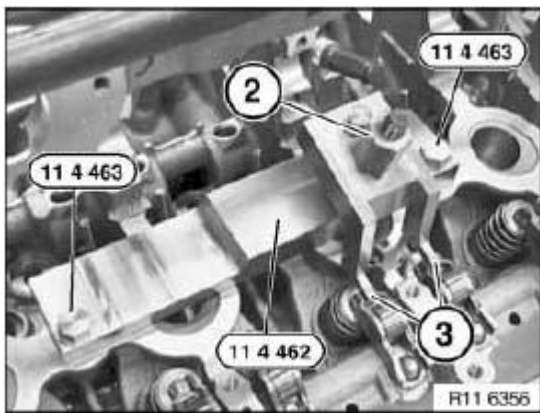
Identifying Special Tools (11 4 463), (11 4 462), Roller Rocker Arms And Cylinder
